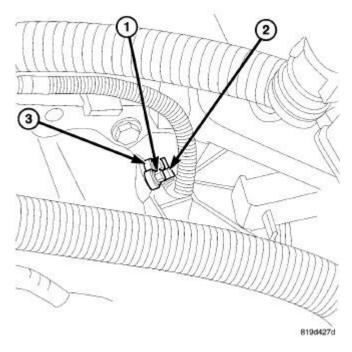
Crankshaft Position Sensor Courtesy of CHRYSLER LLC
